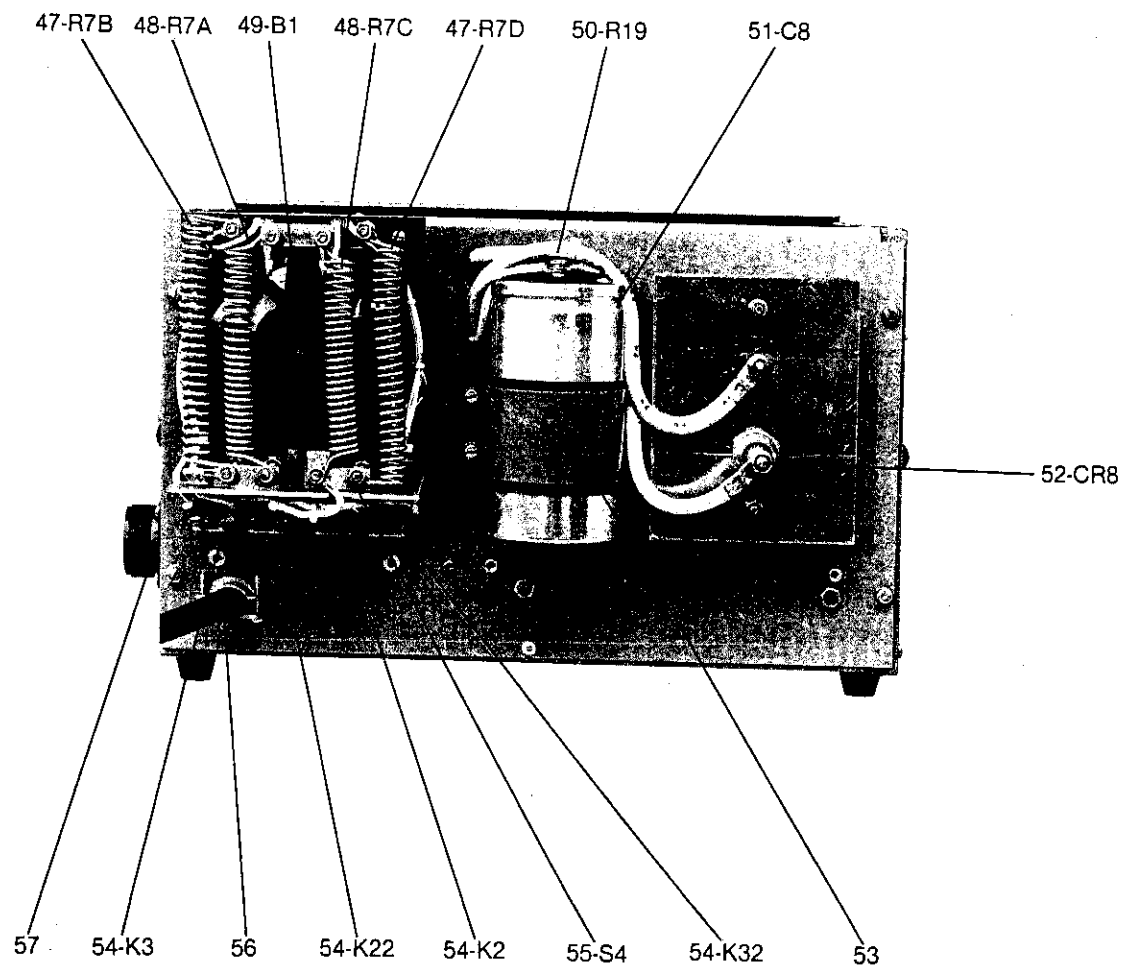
Replaceable Parts-Main Assembly (Sheet 4 of 4)
